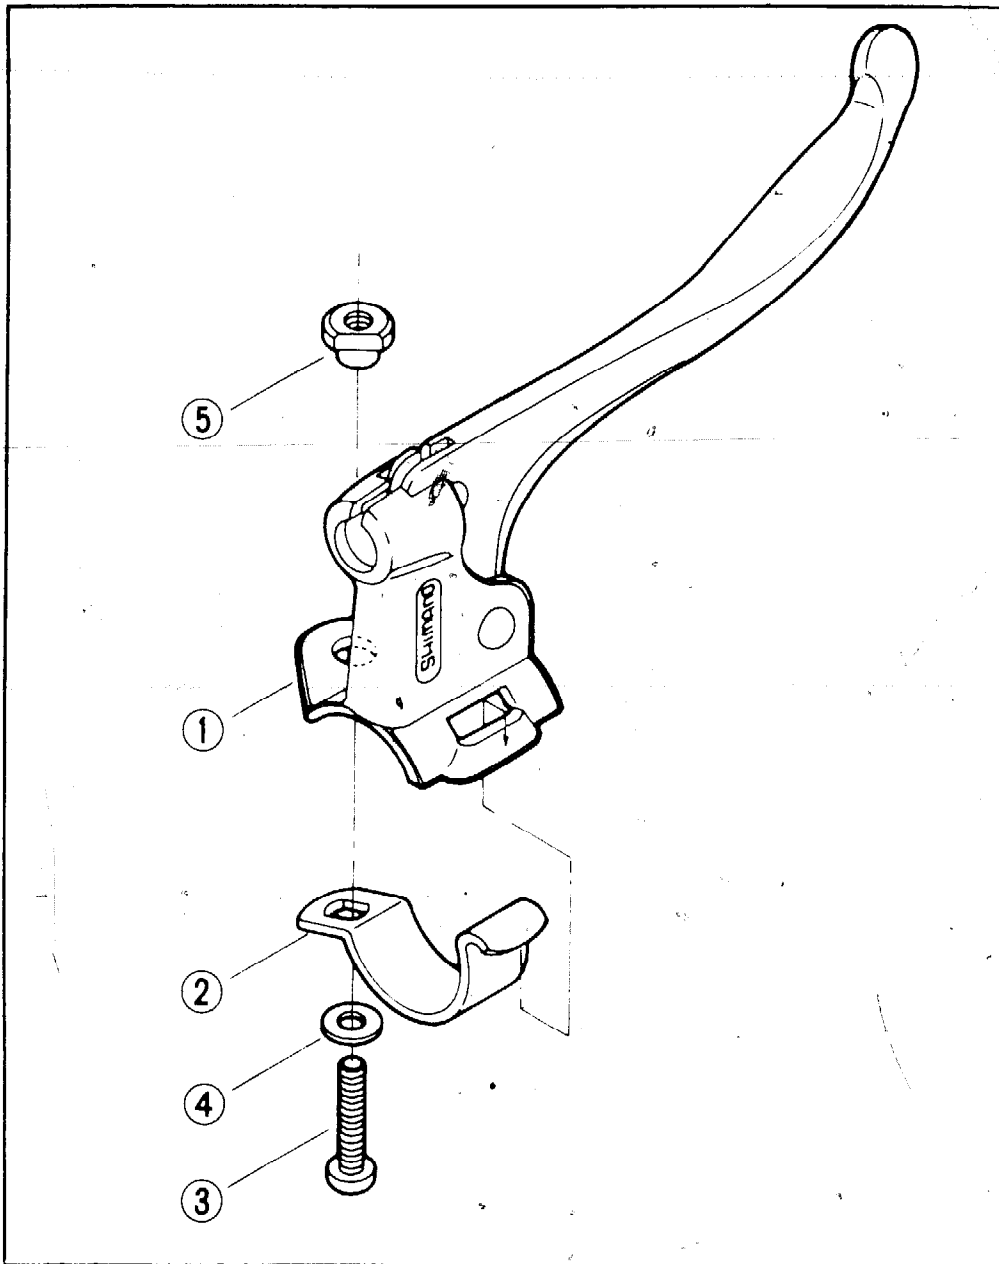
Shimano Model MD-100 brake lever. Parts are: (1) lever bracket complete, (2) clamp, (3) lever fixing bolt, (4) lever fixing washer and (5) lever fixing nut.
